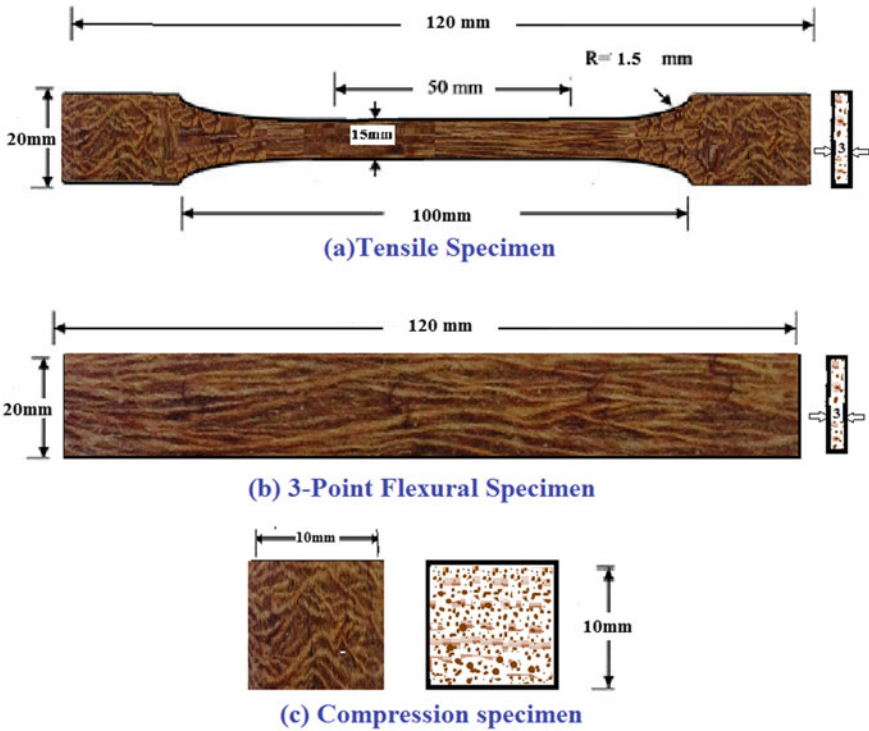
Specimens and dimensions. a Tensile specimen. b Three-point flexural specimen. c Compression specimen
